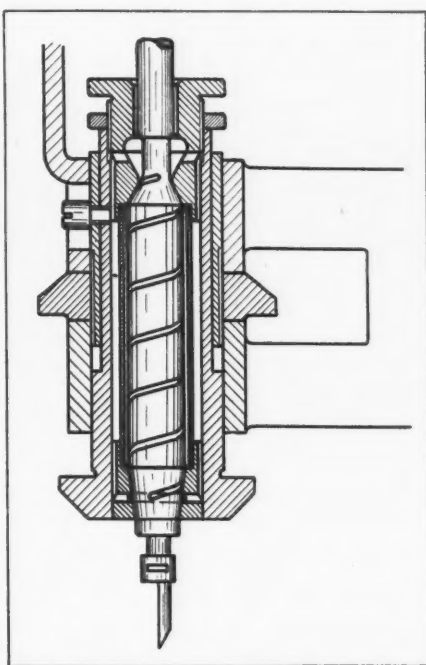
Cutter-spindle Mounting—Plain Bearings
